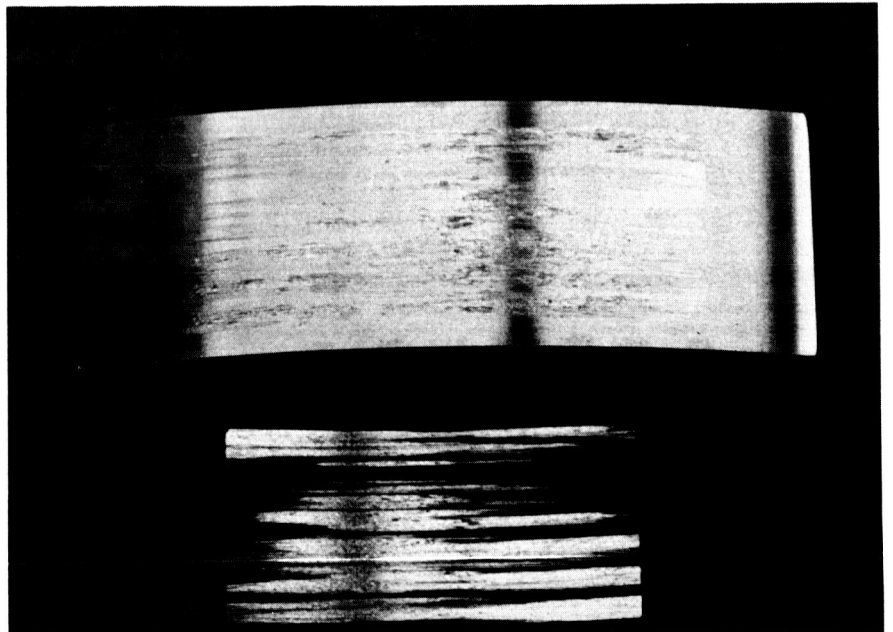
BALL JOINT TEST SPECIMEN TYPE - 2
